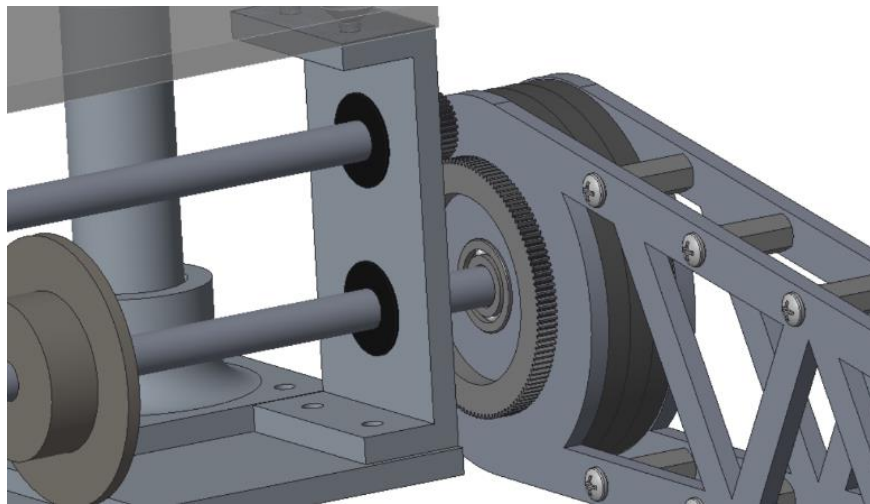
Closeup of the mesh between the arm gear and the gear attached to the armshaft
